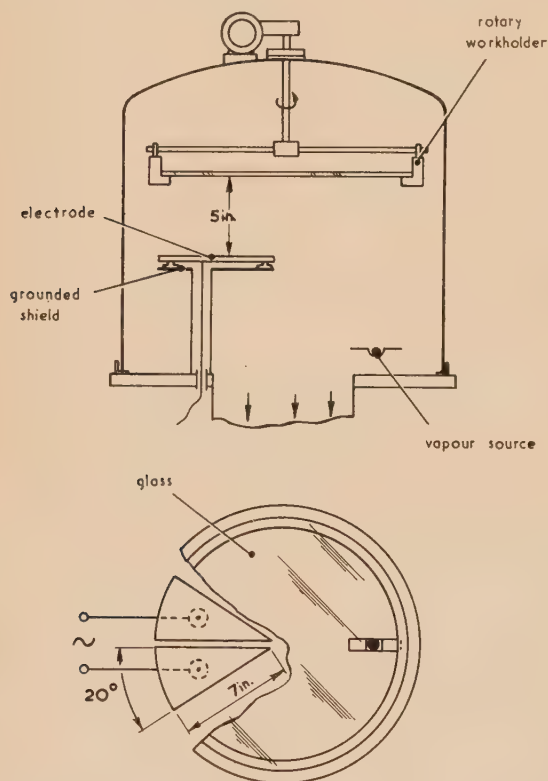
Sector cathodes used with a rotary work holder in a vacuum evaporation plant (dimensions are given in inches)
